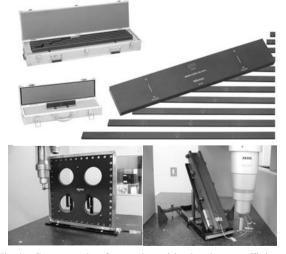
Gauge made of ceramics with ultra-low coefficient of thermal expansion: upper, Gauge block; left, Hole plate; right, Ball dimension gauge.
